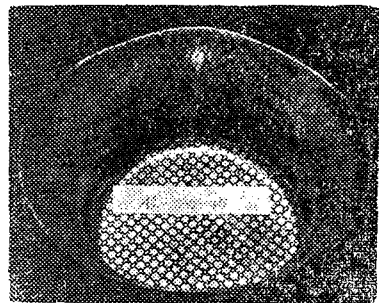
Example of photogripped specimen taken out during the redrawing process
